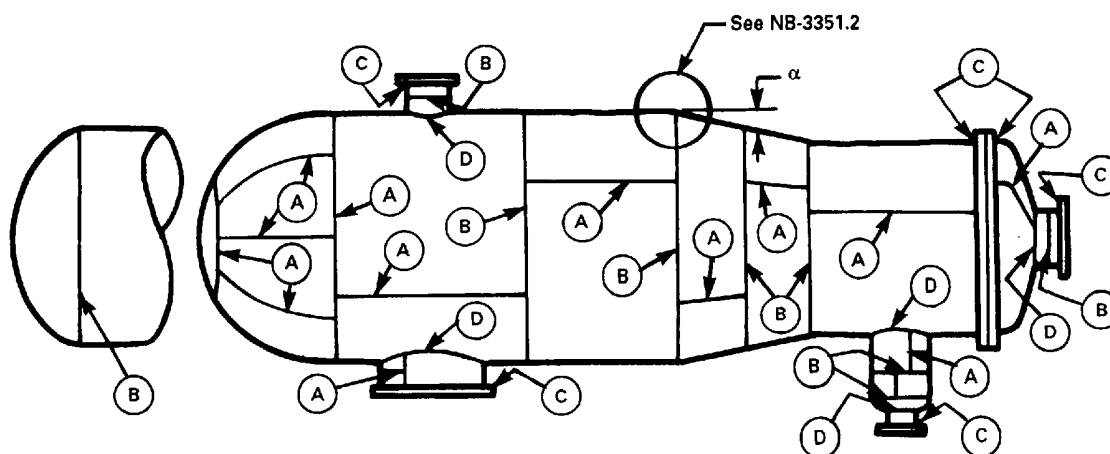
WELDED JOINT LOCATIONS TYPICAL OF CATEGORIES A, B, C, AND D
